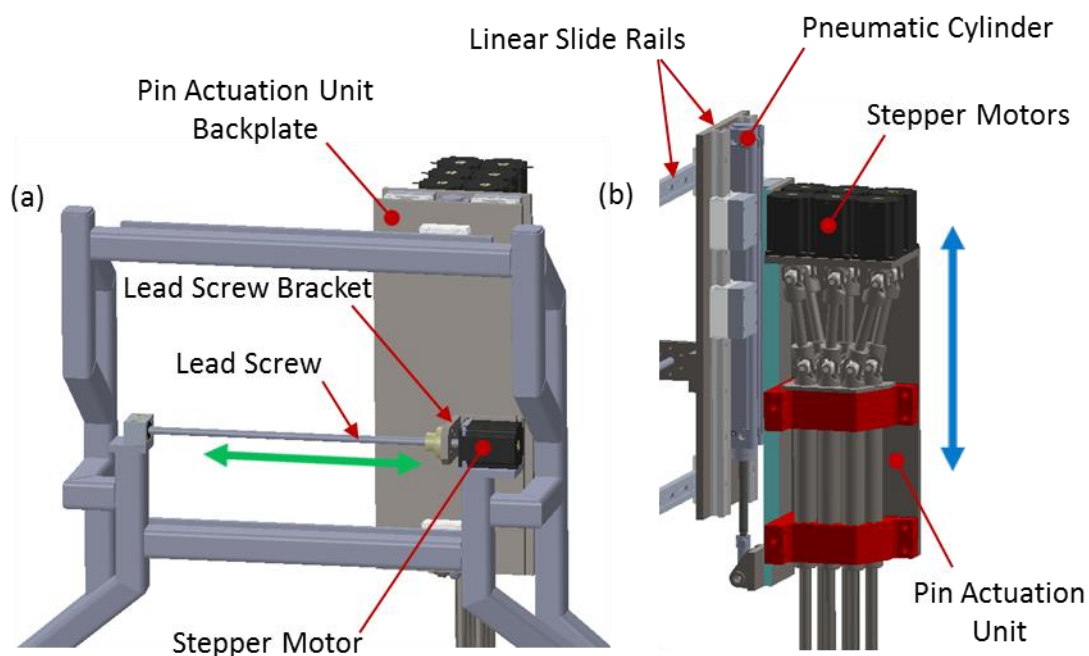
Motion of the pin actuation unit along the Y axis (a) and along the Z axis (b)
